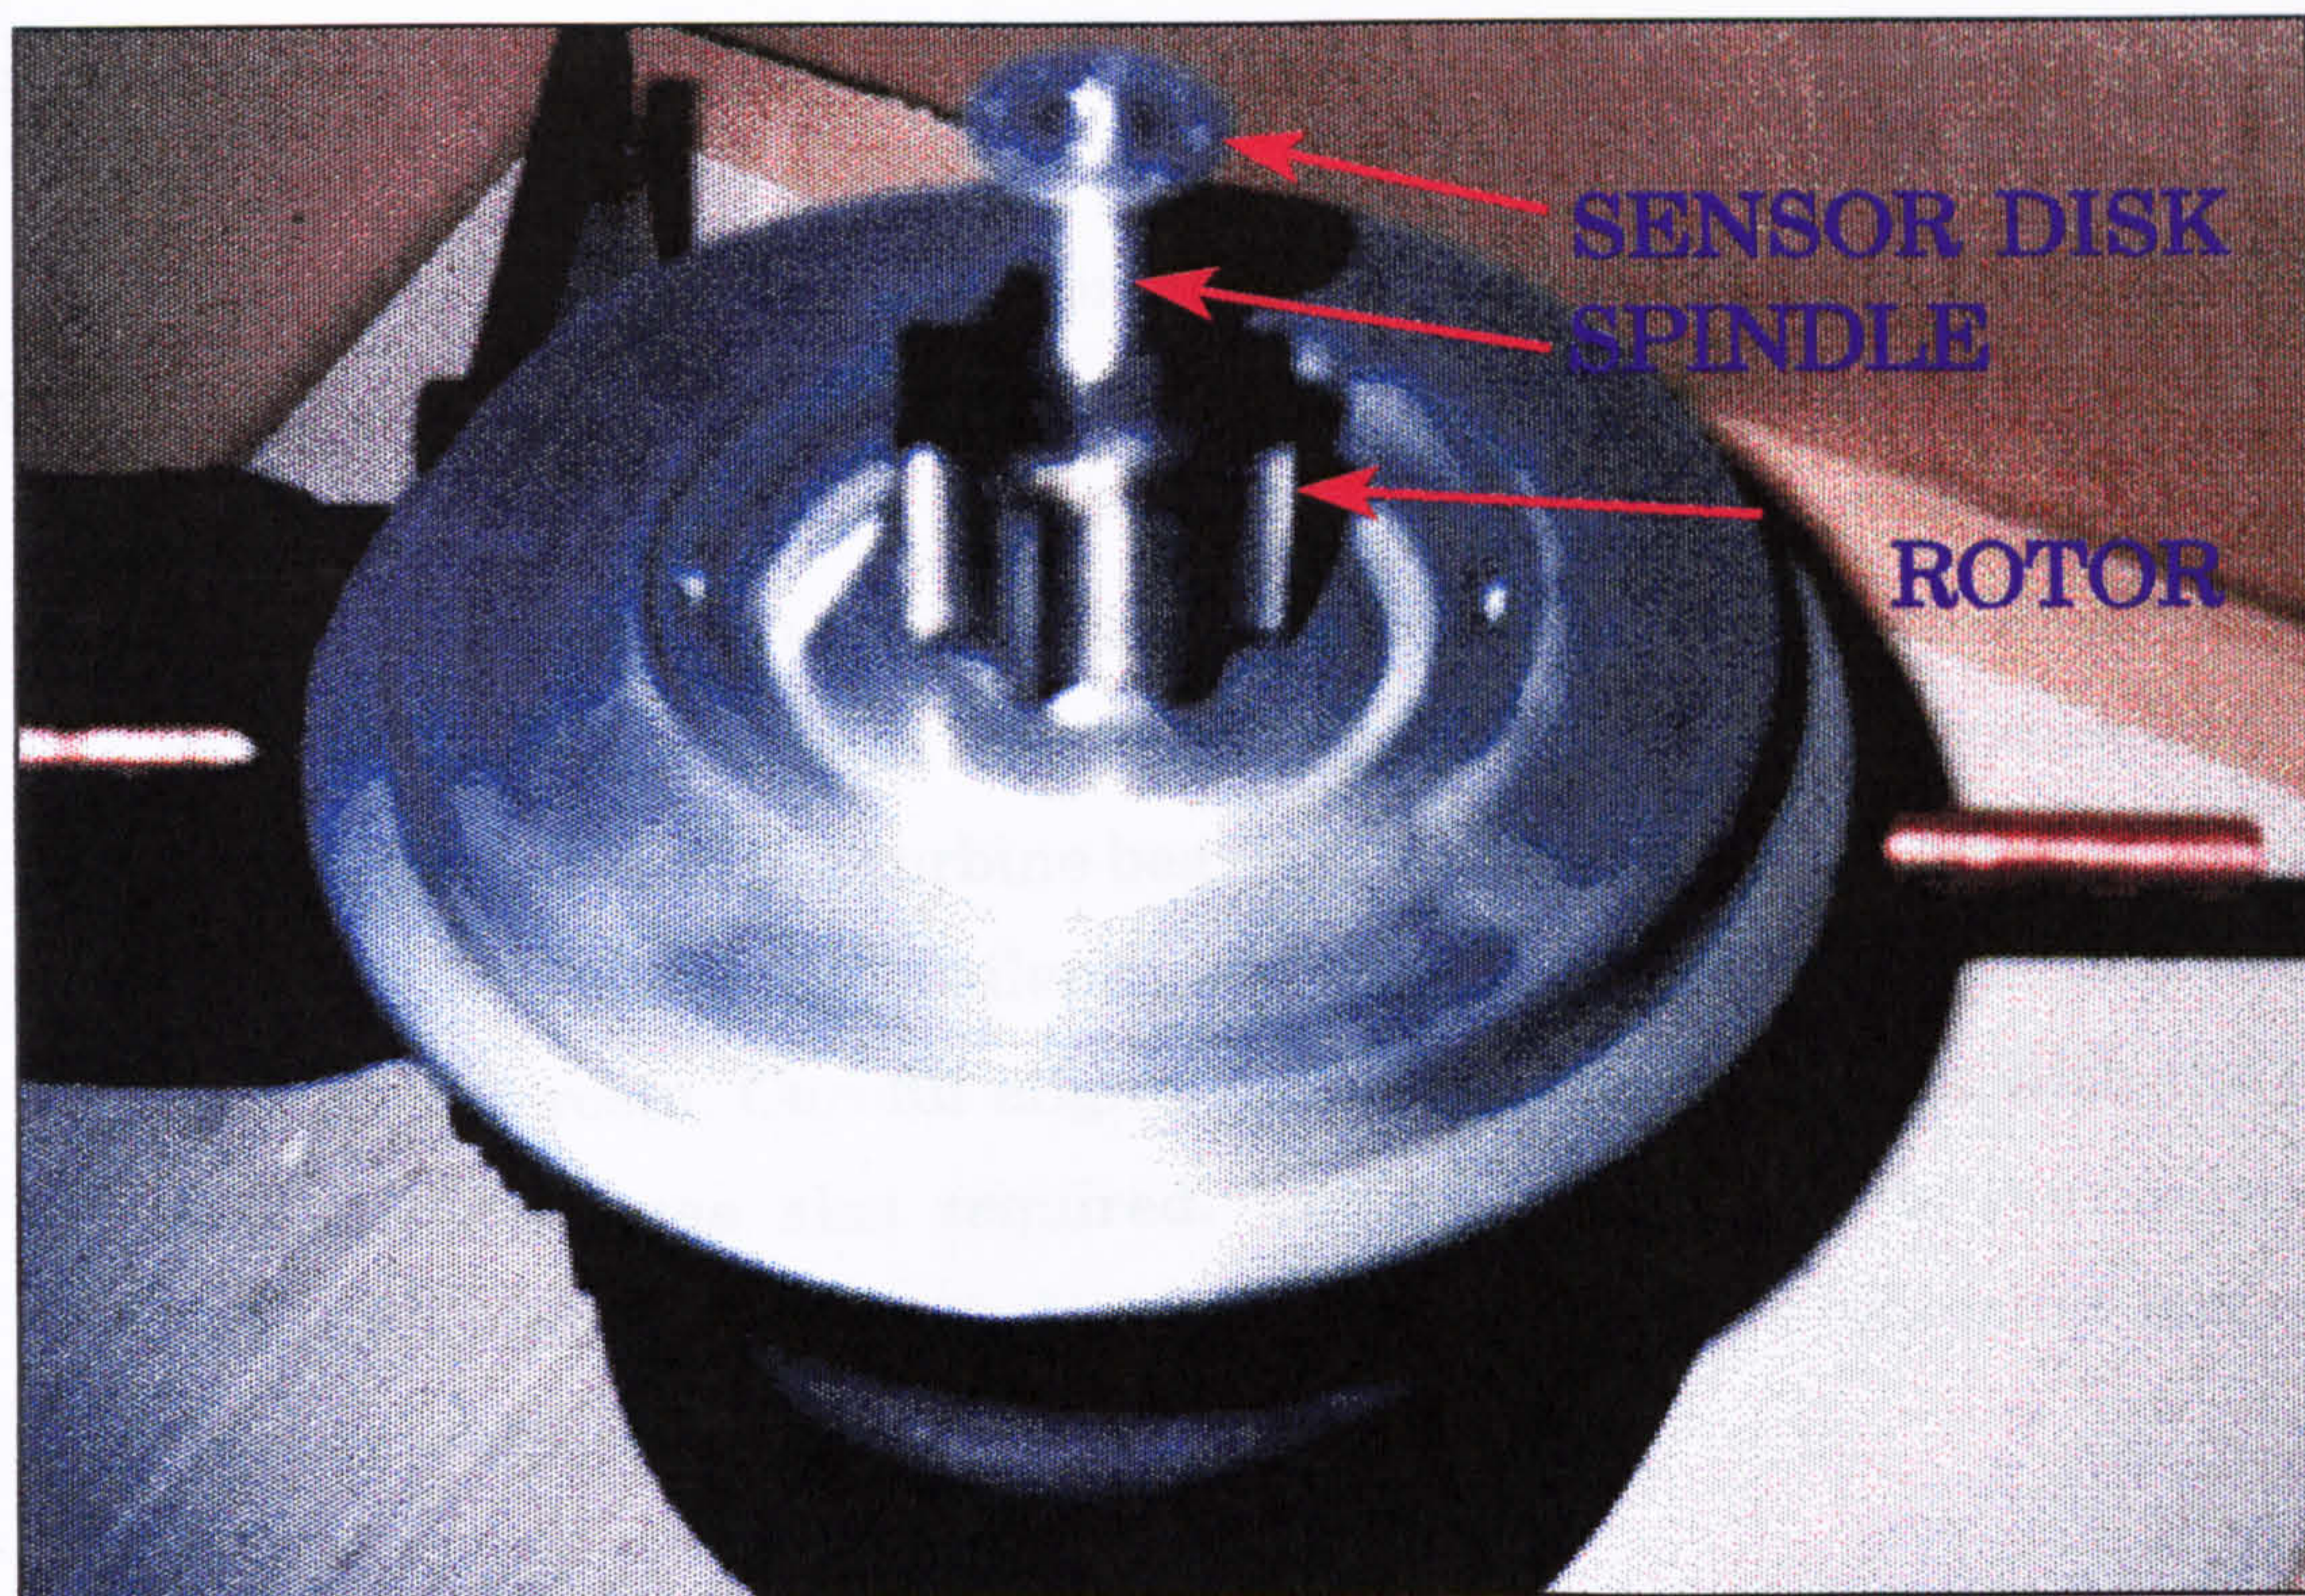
photo of the turbine after mounting the rotor (and the rotor disk) and balancing the shaft.
